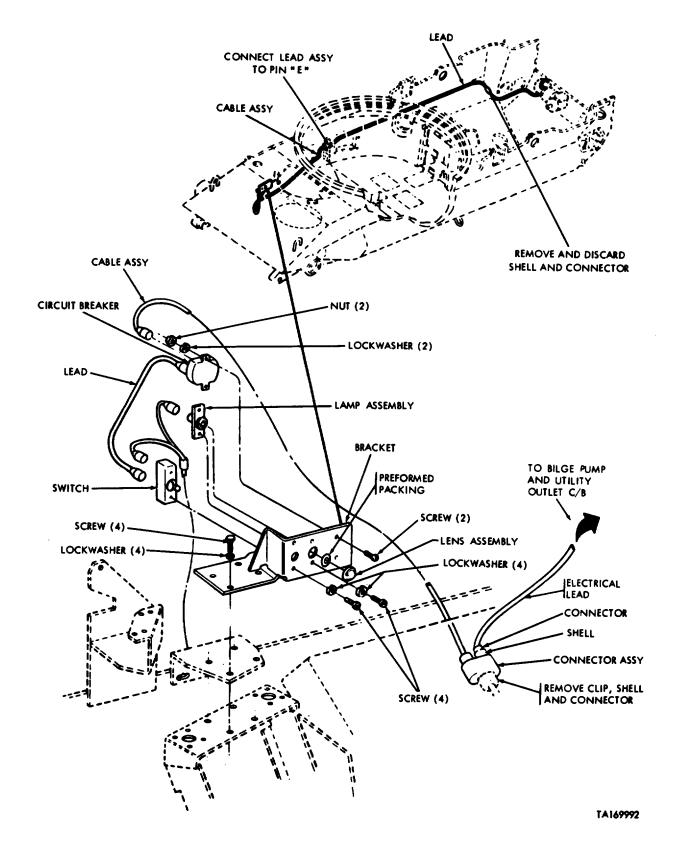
Removal or installation of electrical system components (sheet 2 of 2) (M60A1, M60Al RISE, M60A3 w/o smoke generator).
